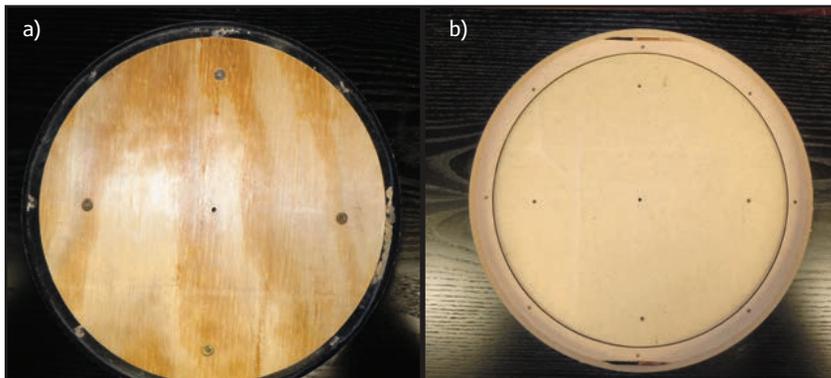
A pivot plate was constructed and inserted into the original woofer mounting hole to provide the alignment point necessary for the Jasper jig and router to properly enlarge the hole (a). The enlarged hole in the bass cabinet is shown with the backer plate and pivot hole before routing of the lower basket clearance hole (b).
